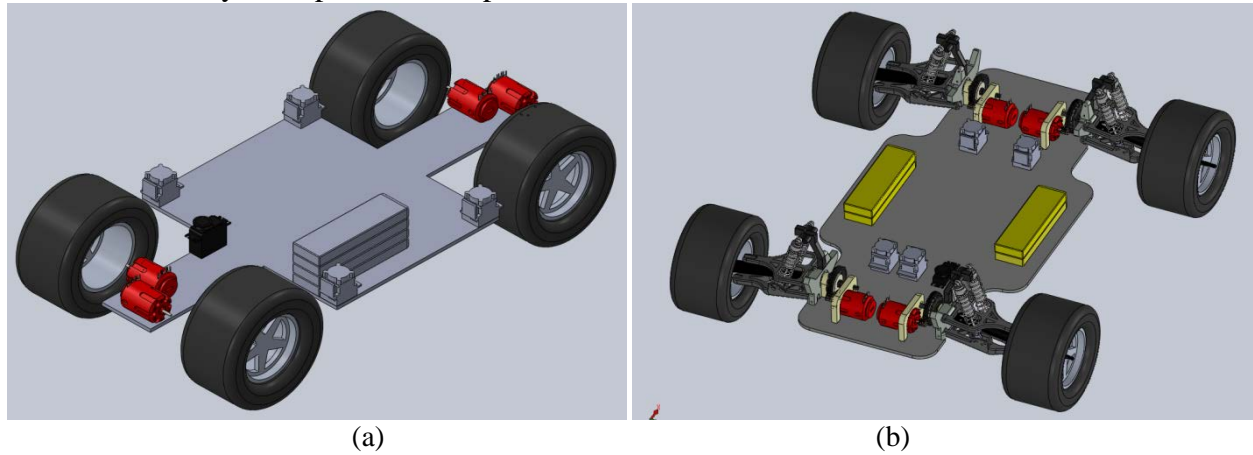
(a) Preliminary prototype CAD drawing; (b) Refined prototype CAD drawing
